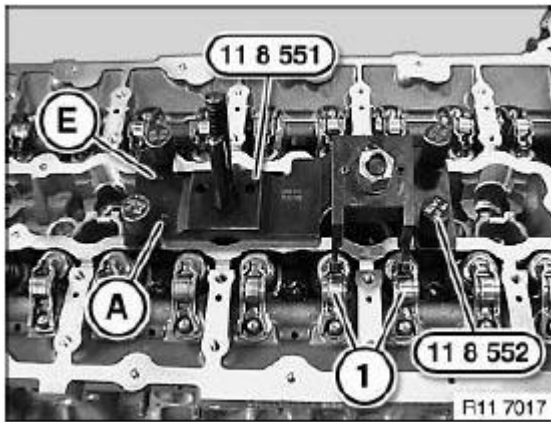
Identifying Roller Cam Follower And Special Tool 11 8 551
